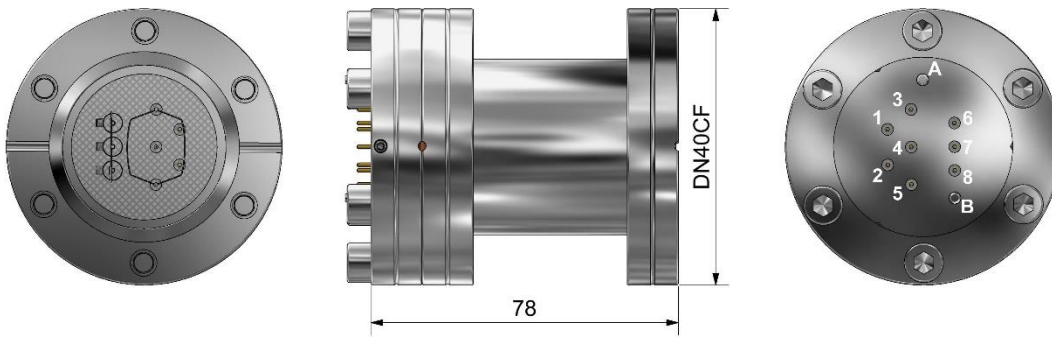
Dimensions Sensor JEVAmeter® IOS (mm) and Pin Assignment
